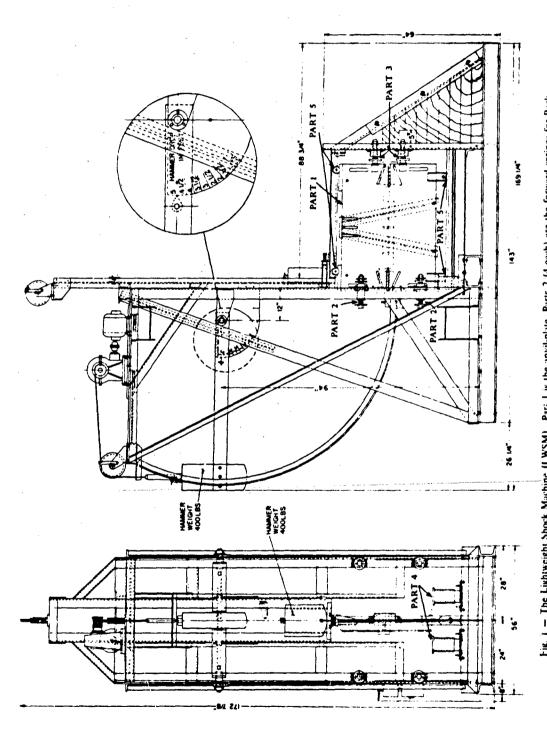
The Lightweight Shock Machine (LWSM). Part I is the anvil-plate, Parts 2 (4 each) are the forward springs for Back blows, Parts 3 (2 each) the forward springs for Edge blows, and Parts 5 (6 each) the anvil-plate guide rollers for Edge blows. The LWSM is drawn with the anvil-plate oriented for Edge blows.
